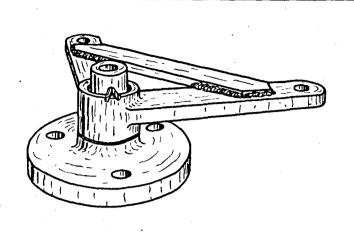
OLD STANDARD CRANK & CRANK STAND ASSEMBLY.
